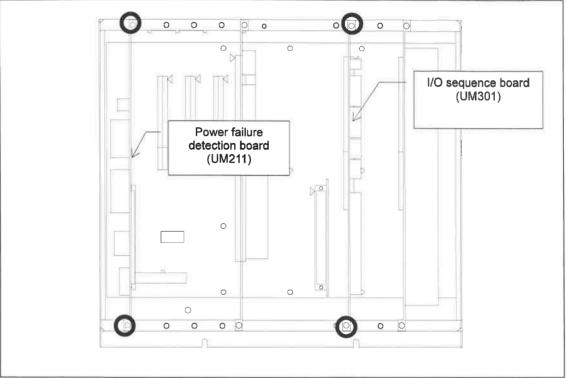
Replacement of the I/O sequence board UM301 and the power failure detection board UM211 (CPU unit)
